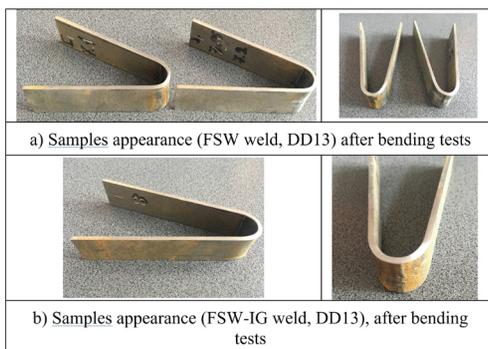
Samples appearance- bending tests (FSW, FSW-IG welds)
